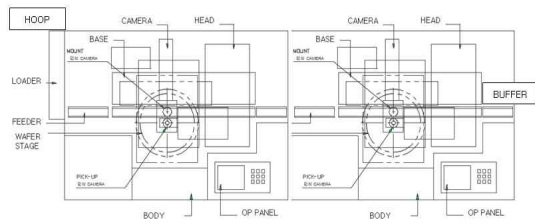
Drawing of Chip Bonding Machine Lay-out.
